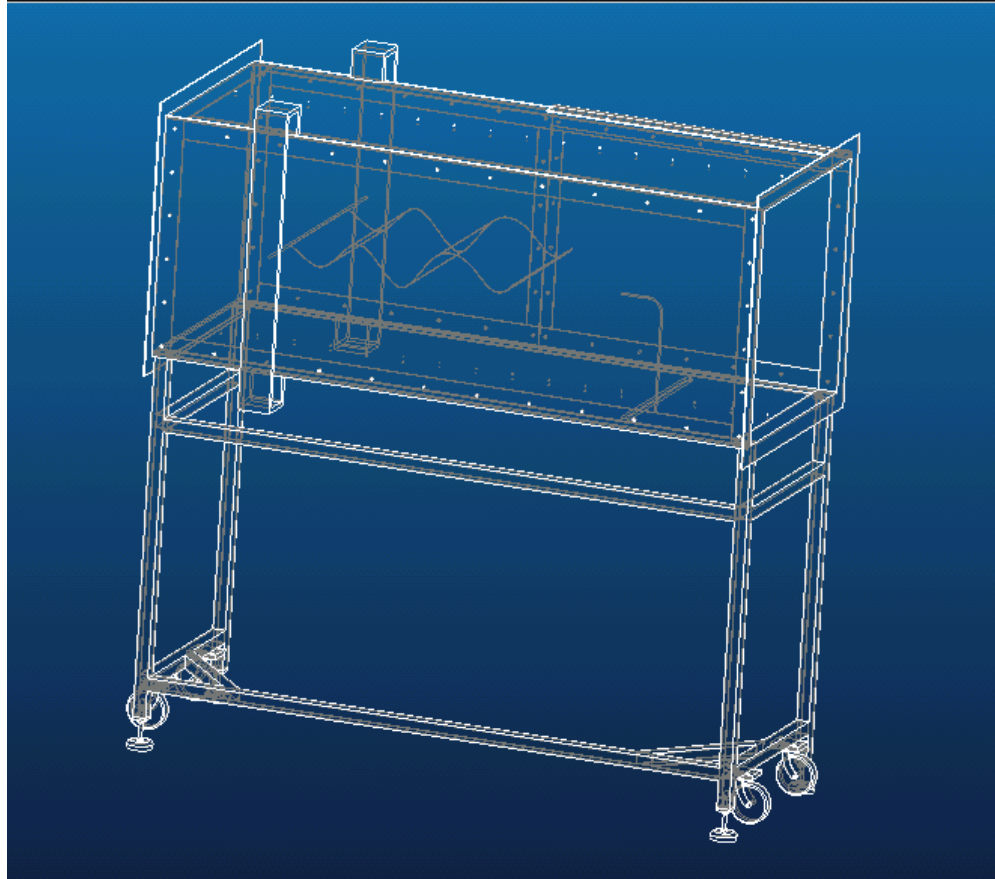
Wind tunnel test section illustration with specimen and pitot tube probe.
